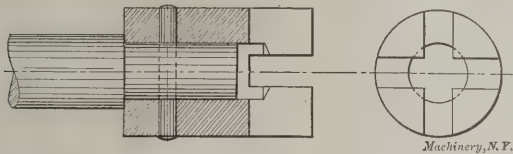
Drive for the Mechanism of the Tool shown in Fig. 10.
